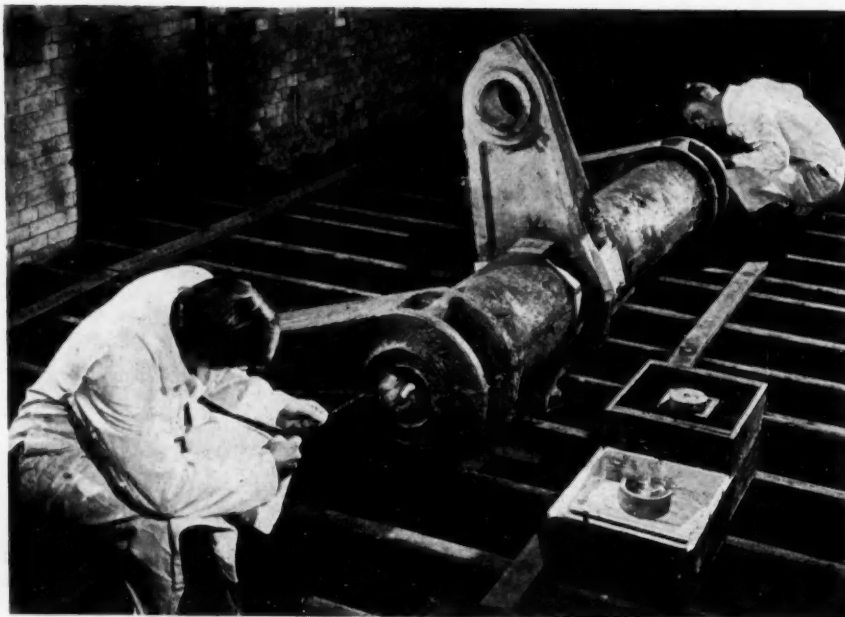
Two technicians prepare large casting for radiographic inspection
